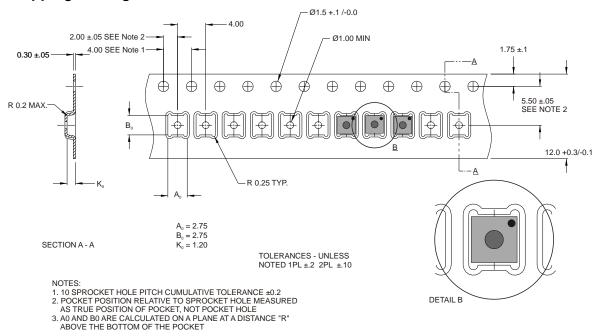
Technical drawing of the packaging tape with sensor orientation in tape. Header tape is to the right and trailer tape to the left on this drawing. Dimensions are given in millimeters.
